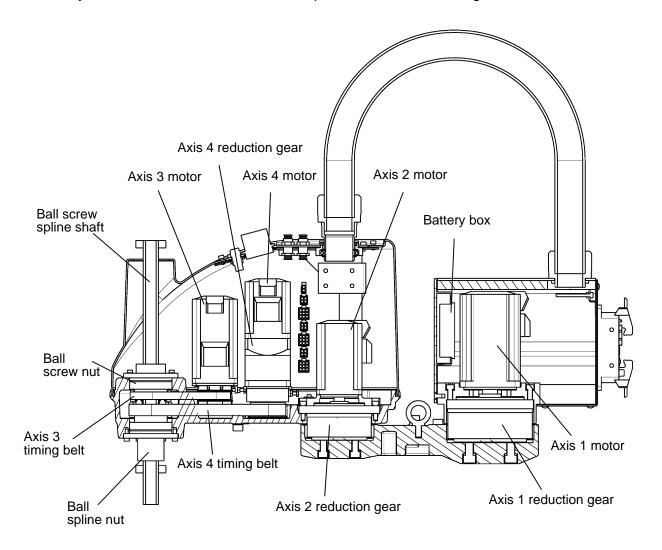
Layout of robot mechanical components (TH450A-T/TH550A-T)
